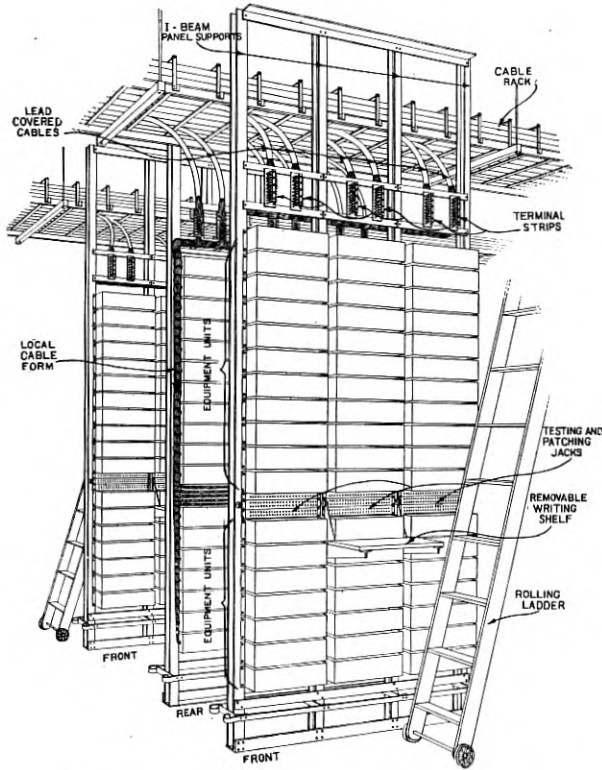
General View Showing Typical Group of Equipment Units Employing Panel Mounting Method
